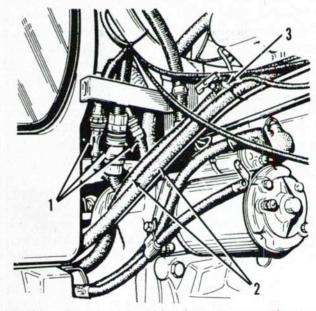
Tractor main wiring harness connectors are located at right front side of cab.
